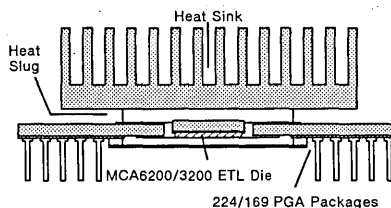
Heat Sink Mounted on the 224/169 PGA Packages
